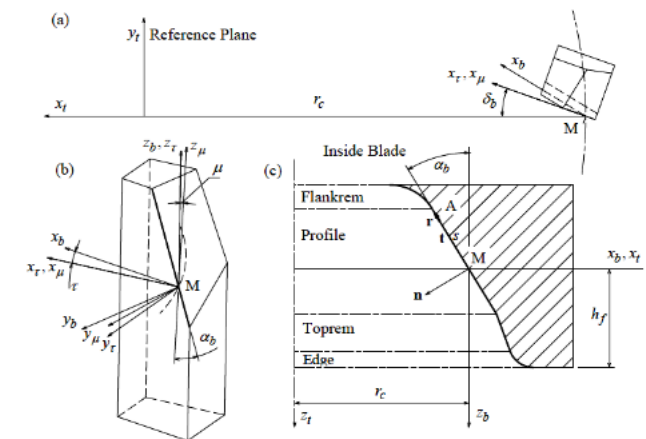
(a) Cutter head, (b) blade and (c) cutting edge geometry
